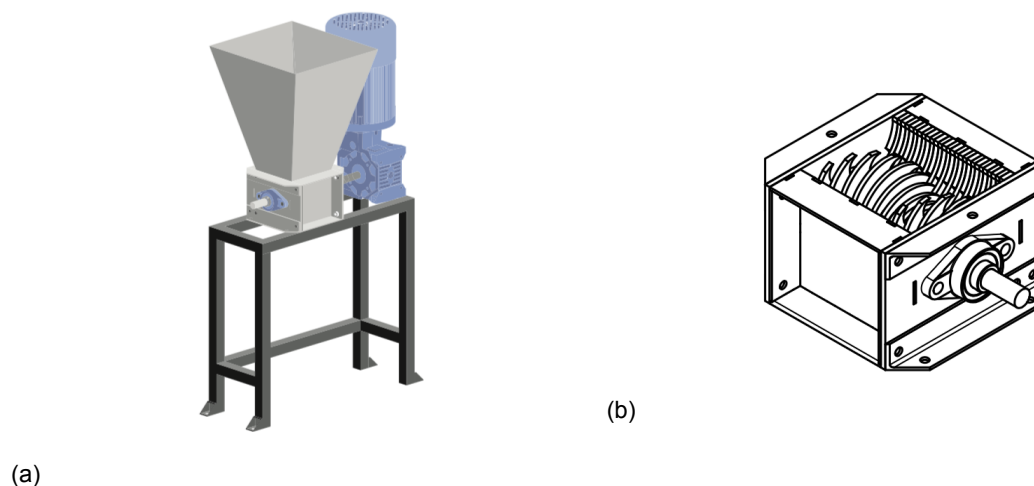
a) Shredding machine [28]. b) Detail of the shredder [28].
